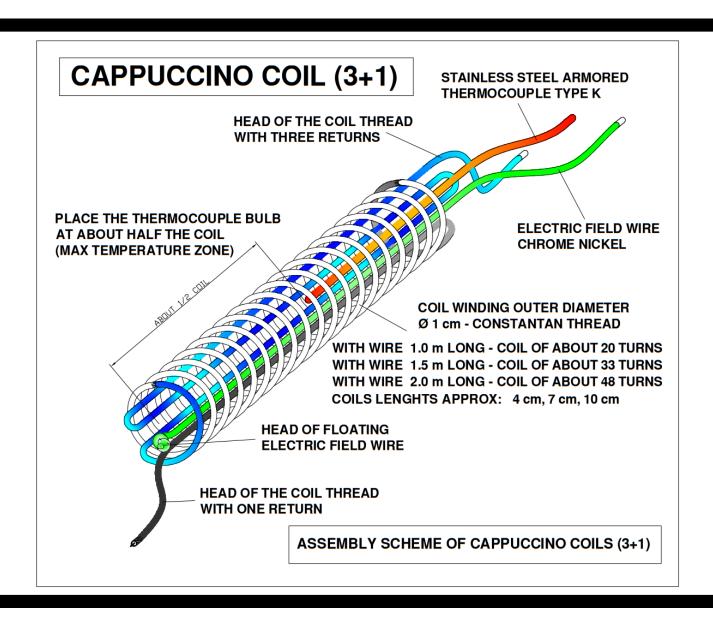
Details of the assembling of typical "Advanced Capuchin knot": thermocouple and Anode wire.
